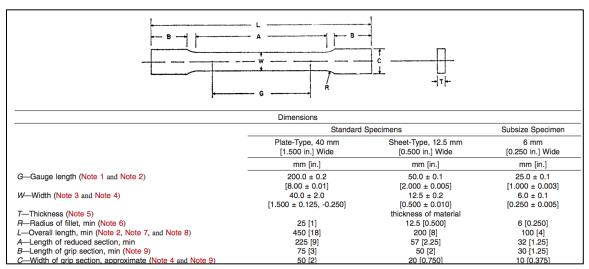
Dimensions of Rectangular Tension Test Specimens (ASTM E8, 2016)
